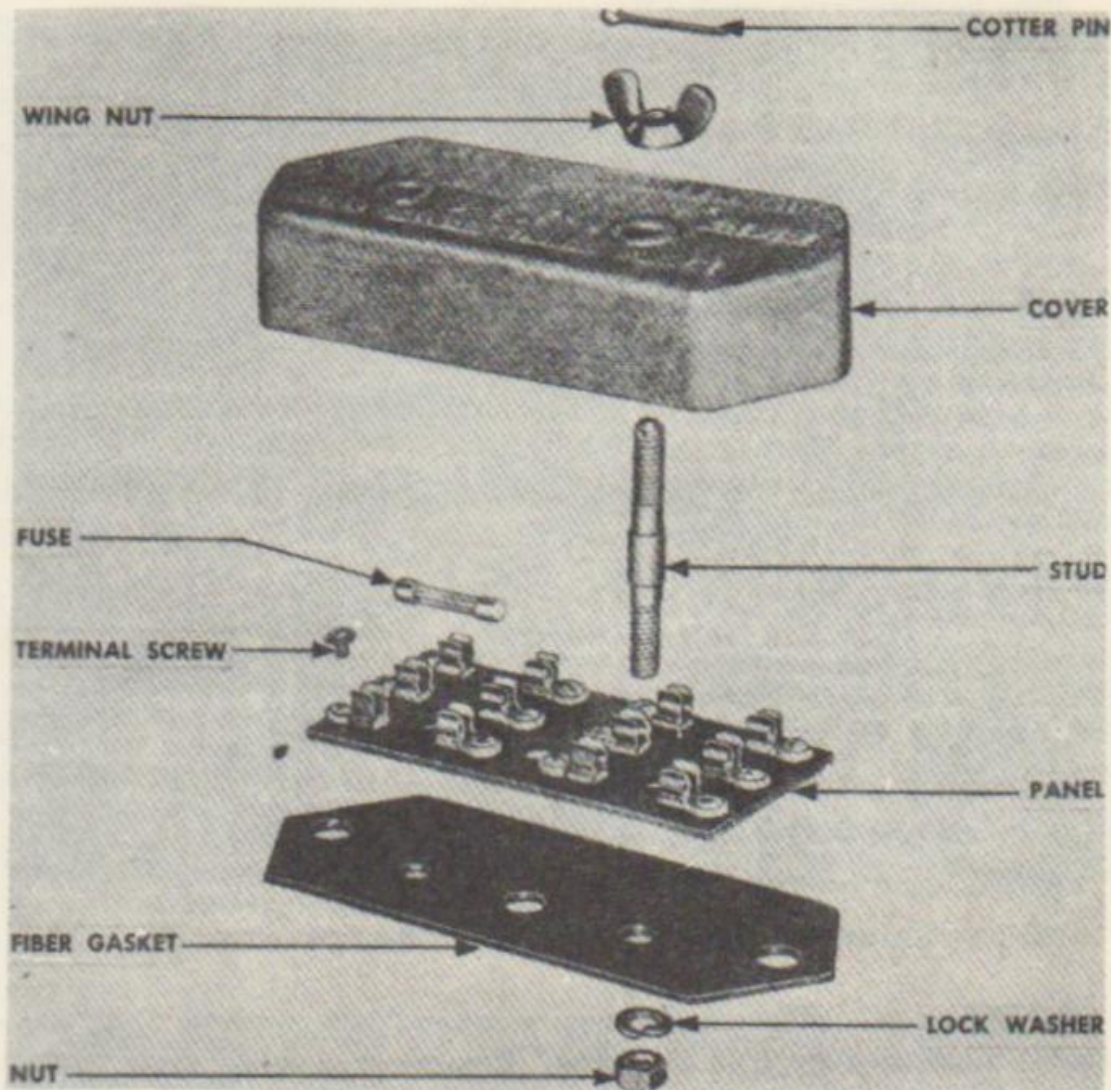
FUSE PANEL—EXPLODED VIEW
